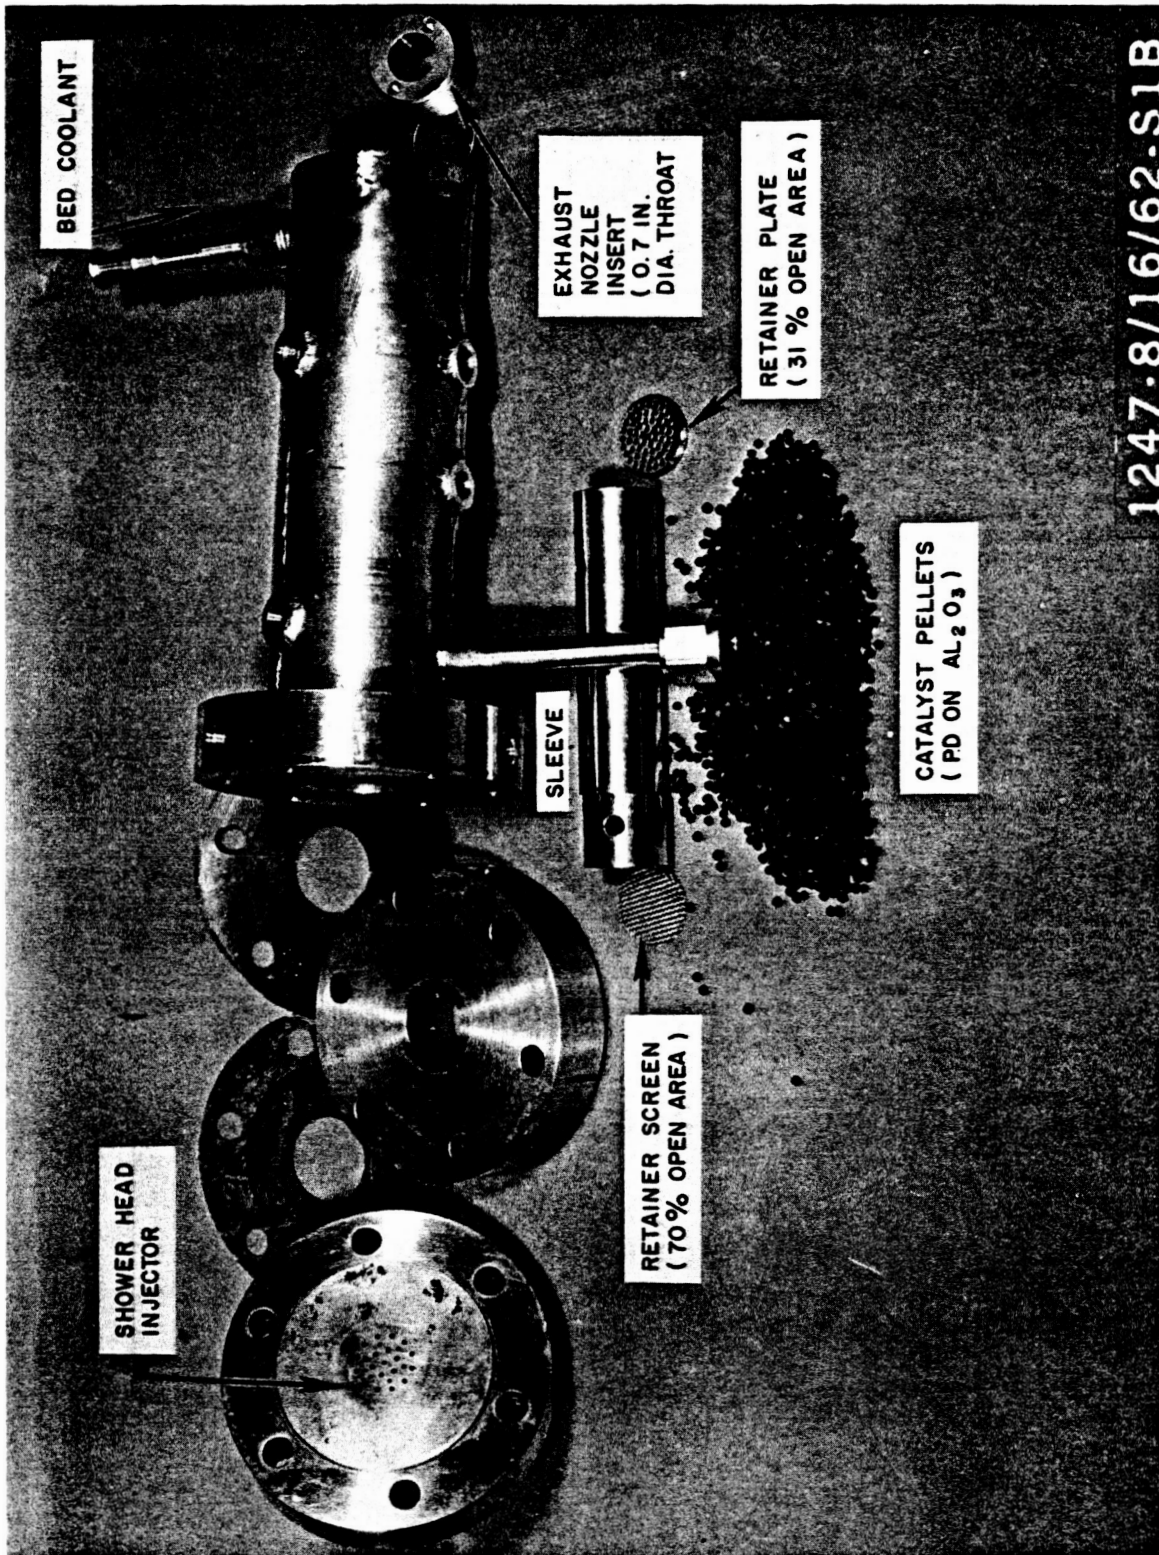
Photograph of 1-inch-Diameter Combustor Disassembled to Show Major Components - 5-inch Catalyst Bed Configuration.
